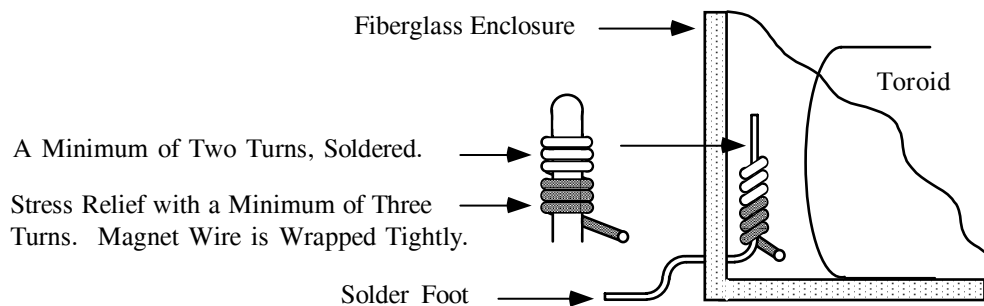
Typical, Solder Terminal on a Surface Mount Device.
